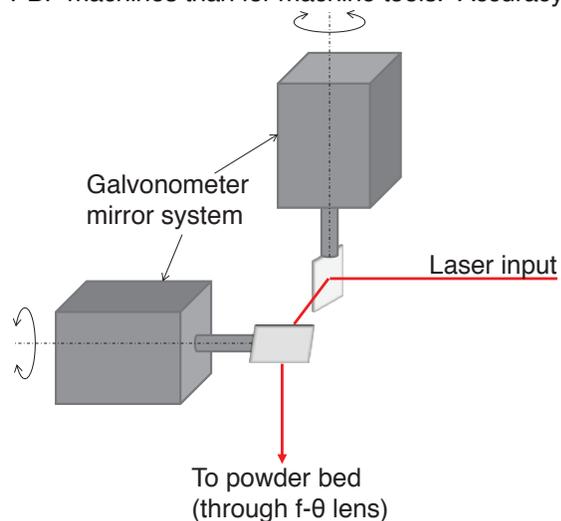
SCHEMATIC DEPICTING THE GALVANOMETER AND MIRROR SYSTEM USED TO MOVE AND POSITION THE LASER BEAM SPOT ON A TYPICAL POWDER BED FUSION MACHINE.
